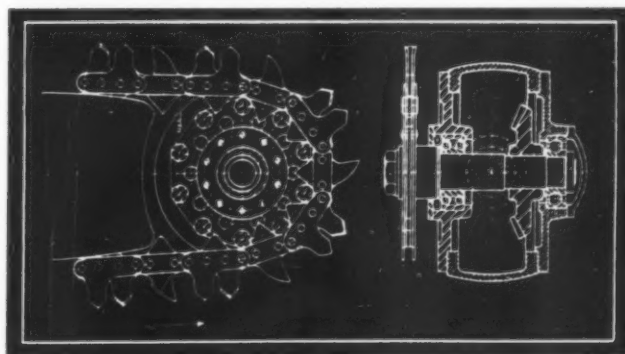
Details of chain drive, showing how the ten-sided disks ease the load on the sprocket pins
